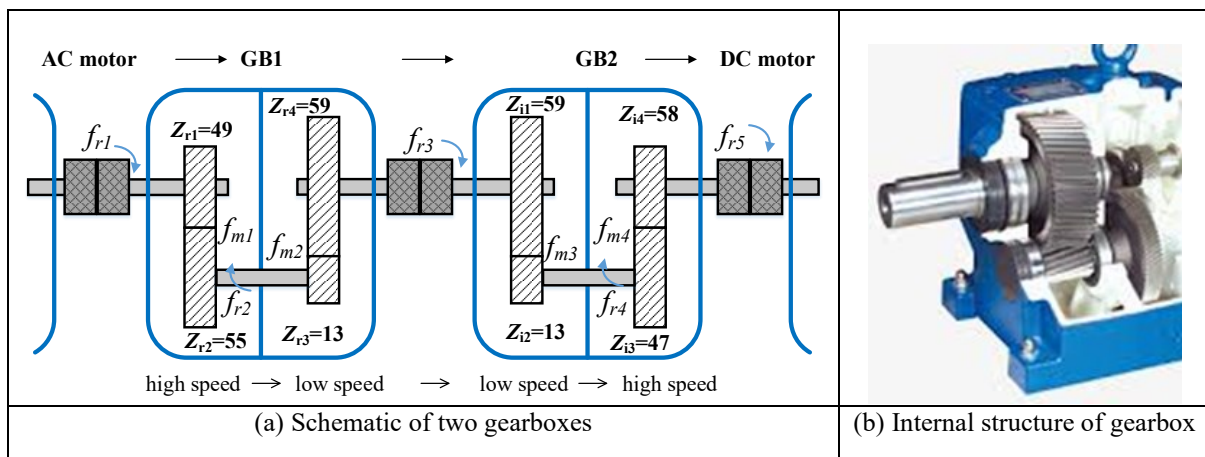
System layout of helical gear transmissions (shaft and gear joints)
